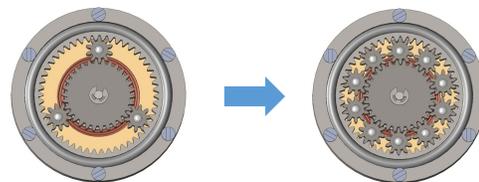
"Planetary" clutch with 3 and 10 (the maximum possible number for current design) planet gears installed.
